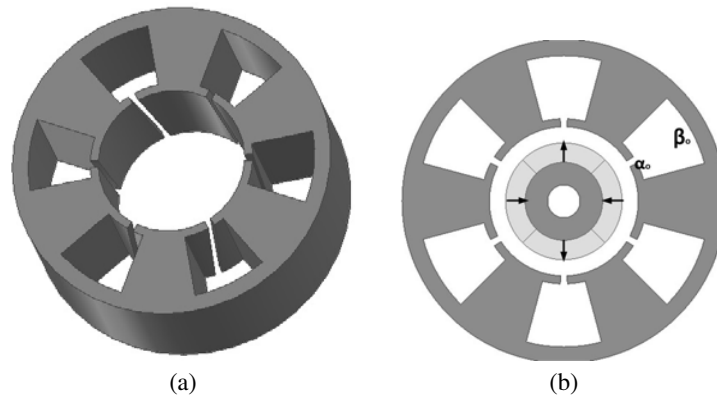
Permanent magnet machine with skewed slot openings, (a) stator with skewed opening, (b) cross sectional view of machine.
